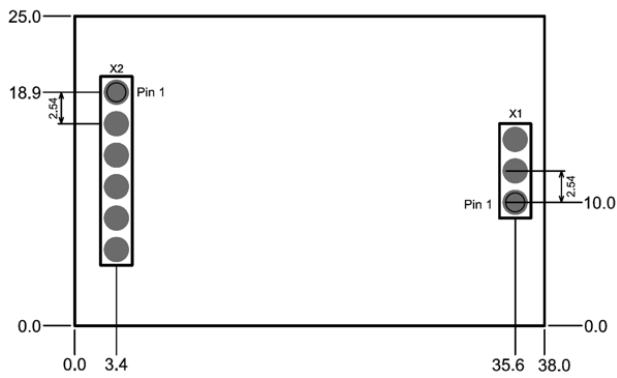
Outline dimensions K-LC7 (SMD-Type)
